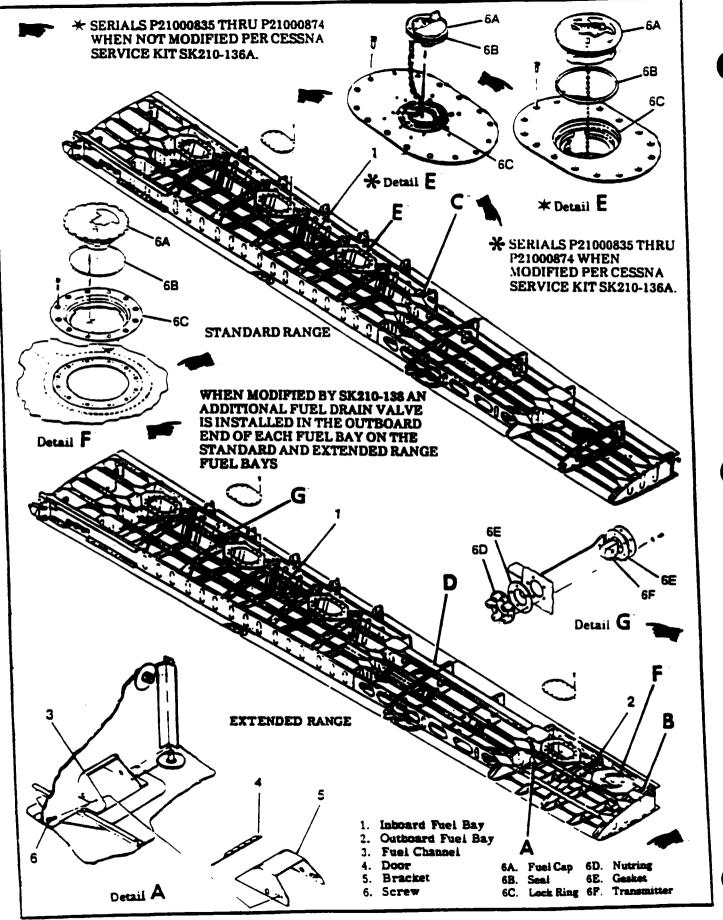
Fuel Bay Vents (Sheet 1 of 2)
